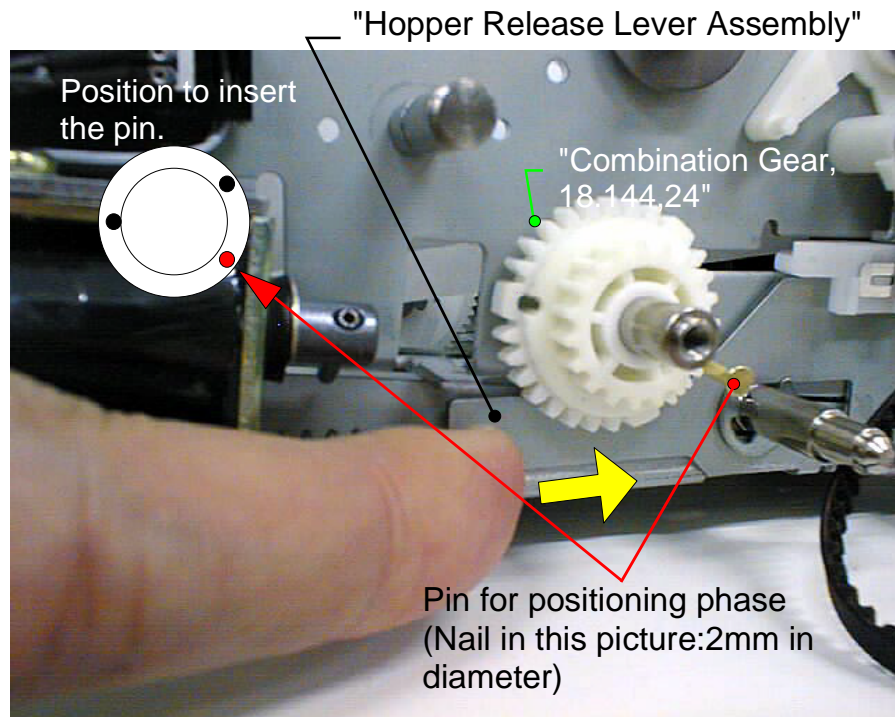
Adjusting Alignment for "Combination Gear,18.144,24"
